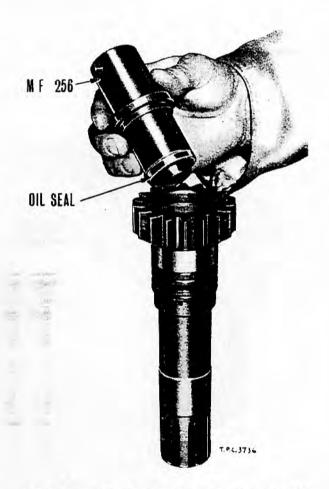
FITTING MAIN DRIVE SHAFT PINION OIL SEAL
